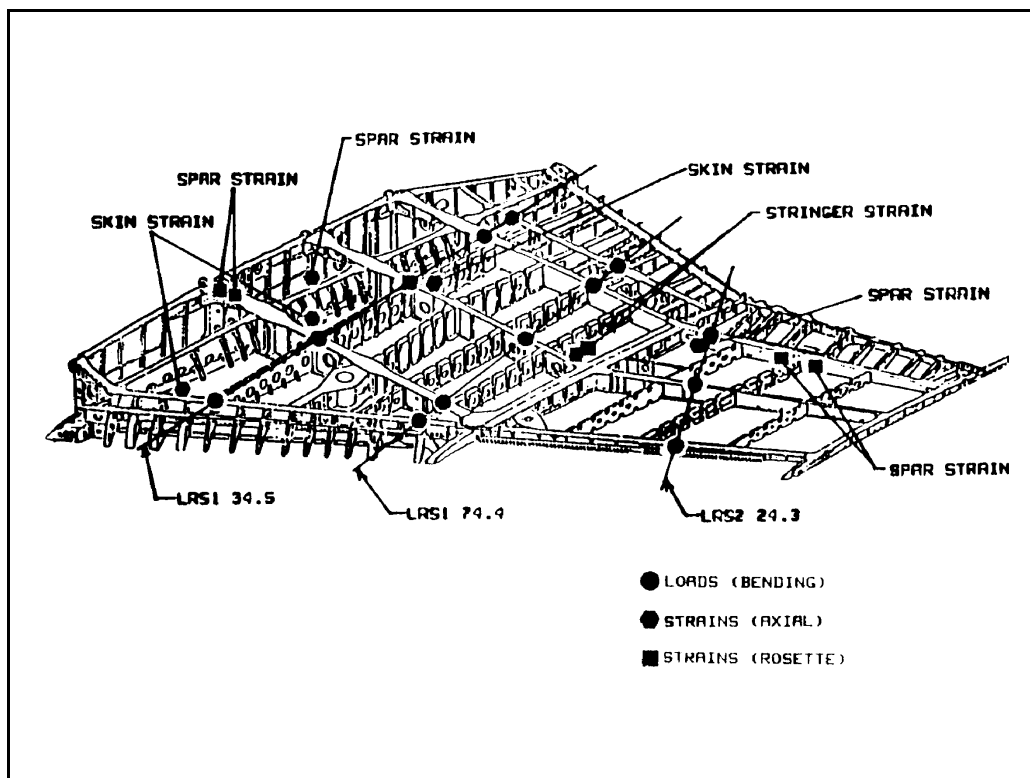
Example Loads Strain Gage Installation - F-15 Wing
